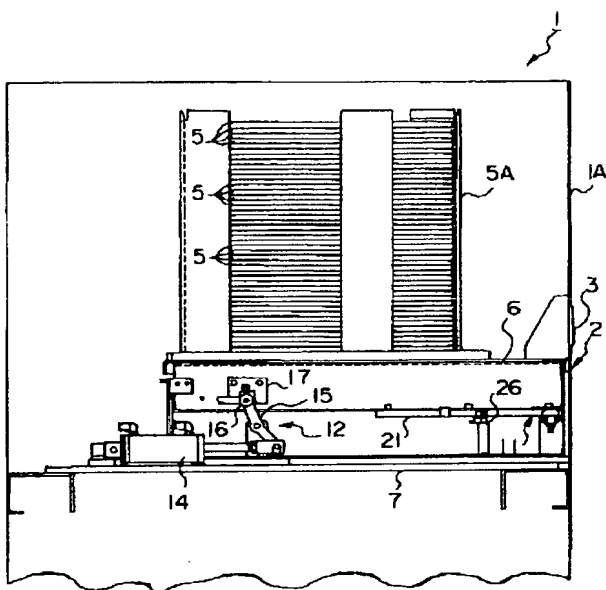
is an enlarged front elevation of the drawer mechanism of Fig.12.
